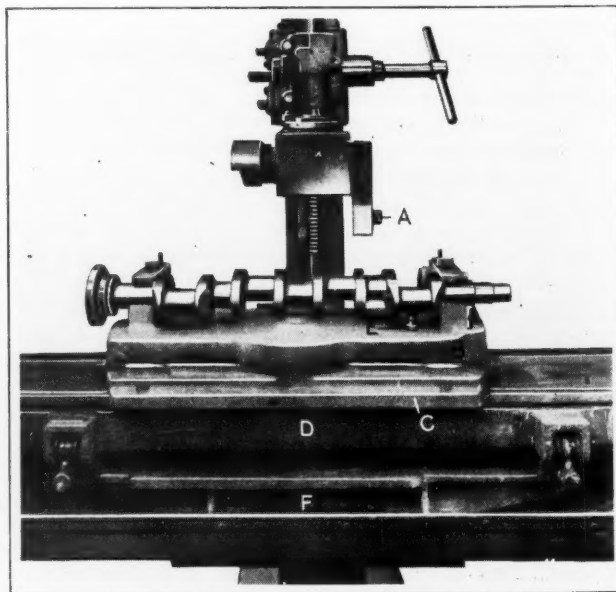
Special Tool-holding Attachment and Fixture designed for reaming and tapping Each End of the One-inch Holes in the Bearings and Crankpins
